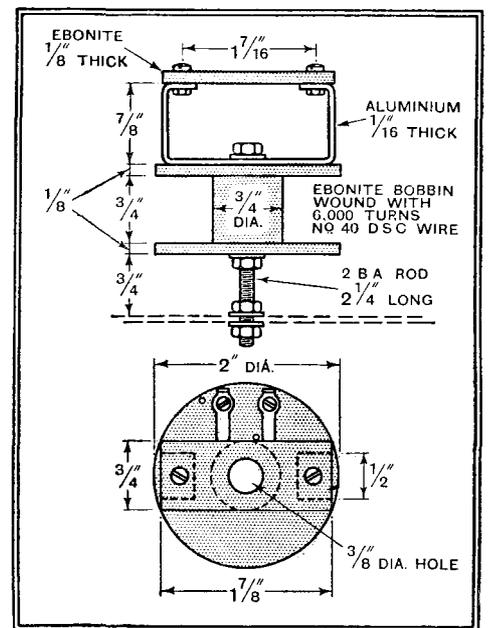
The construction of the whistle suppressor is clearly shown in this drawing; the condenser C14 is carried by the bracket.
